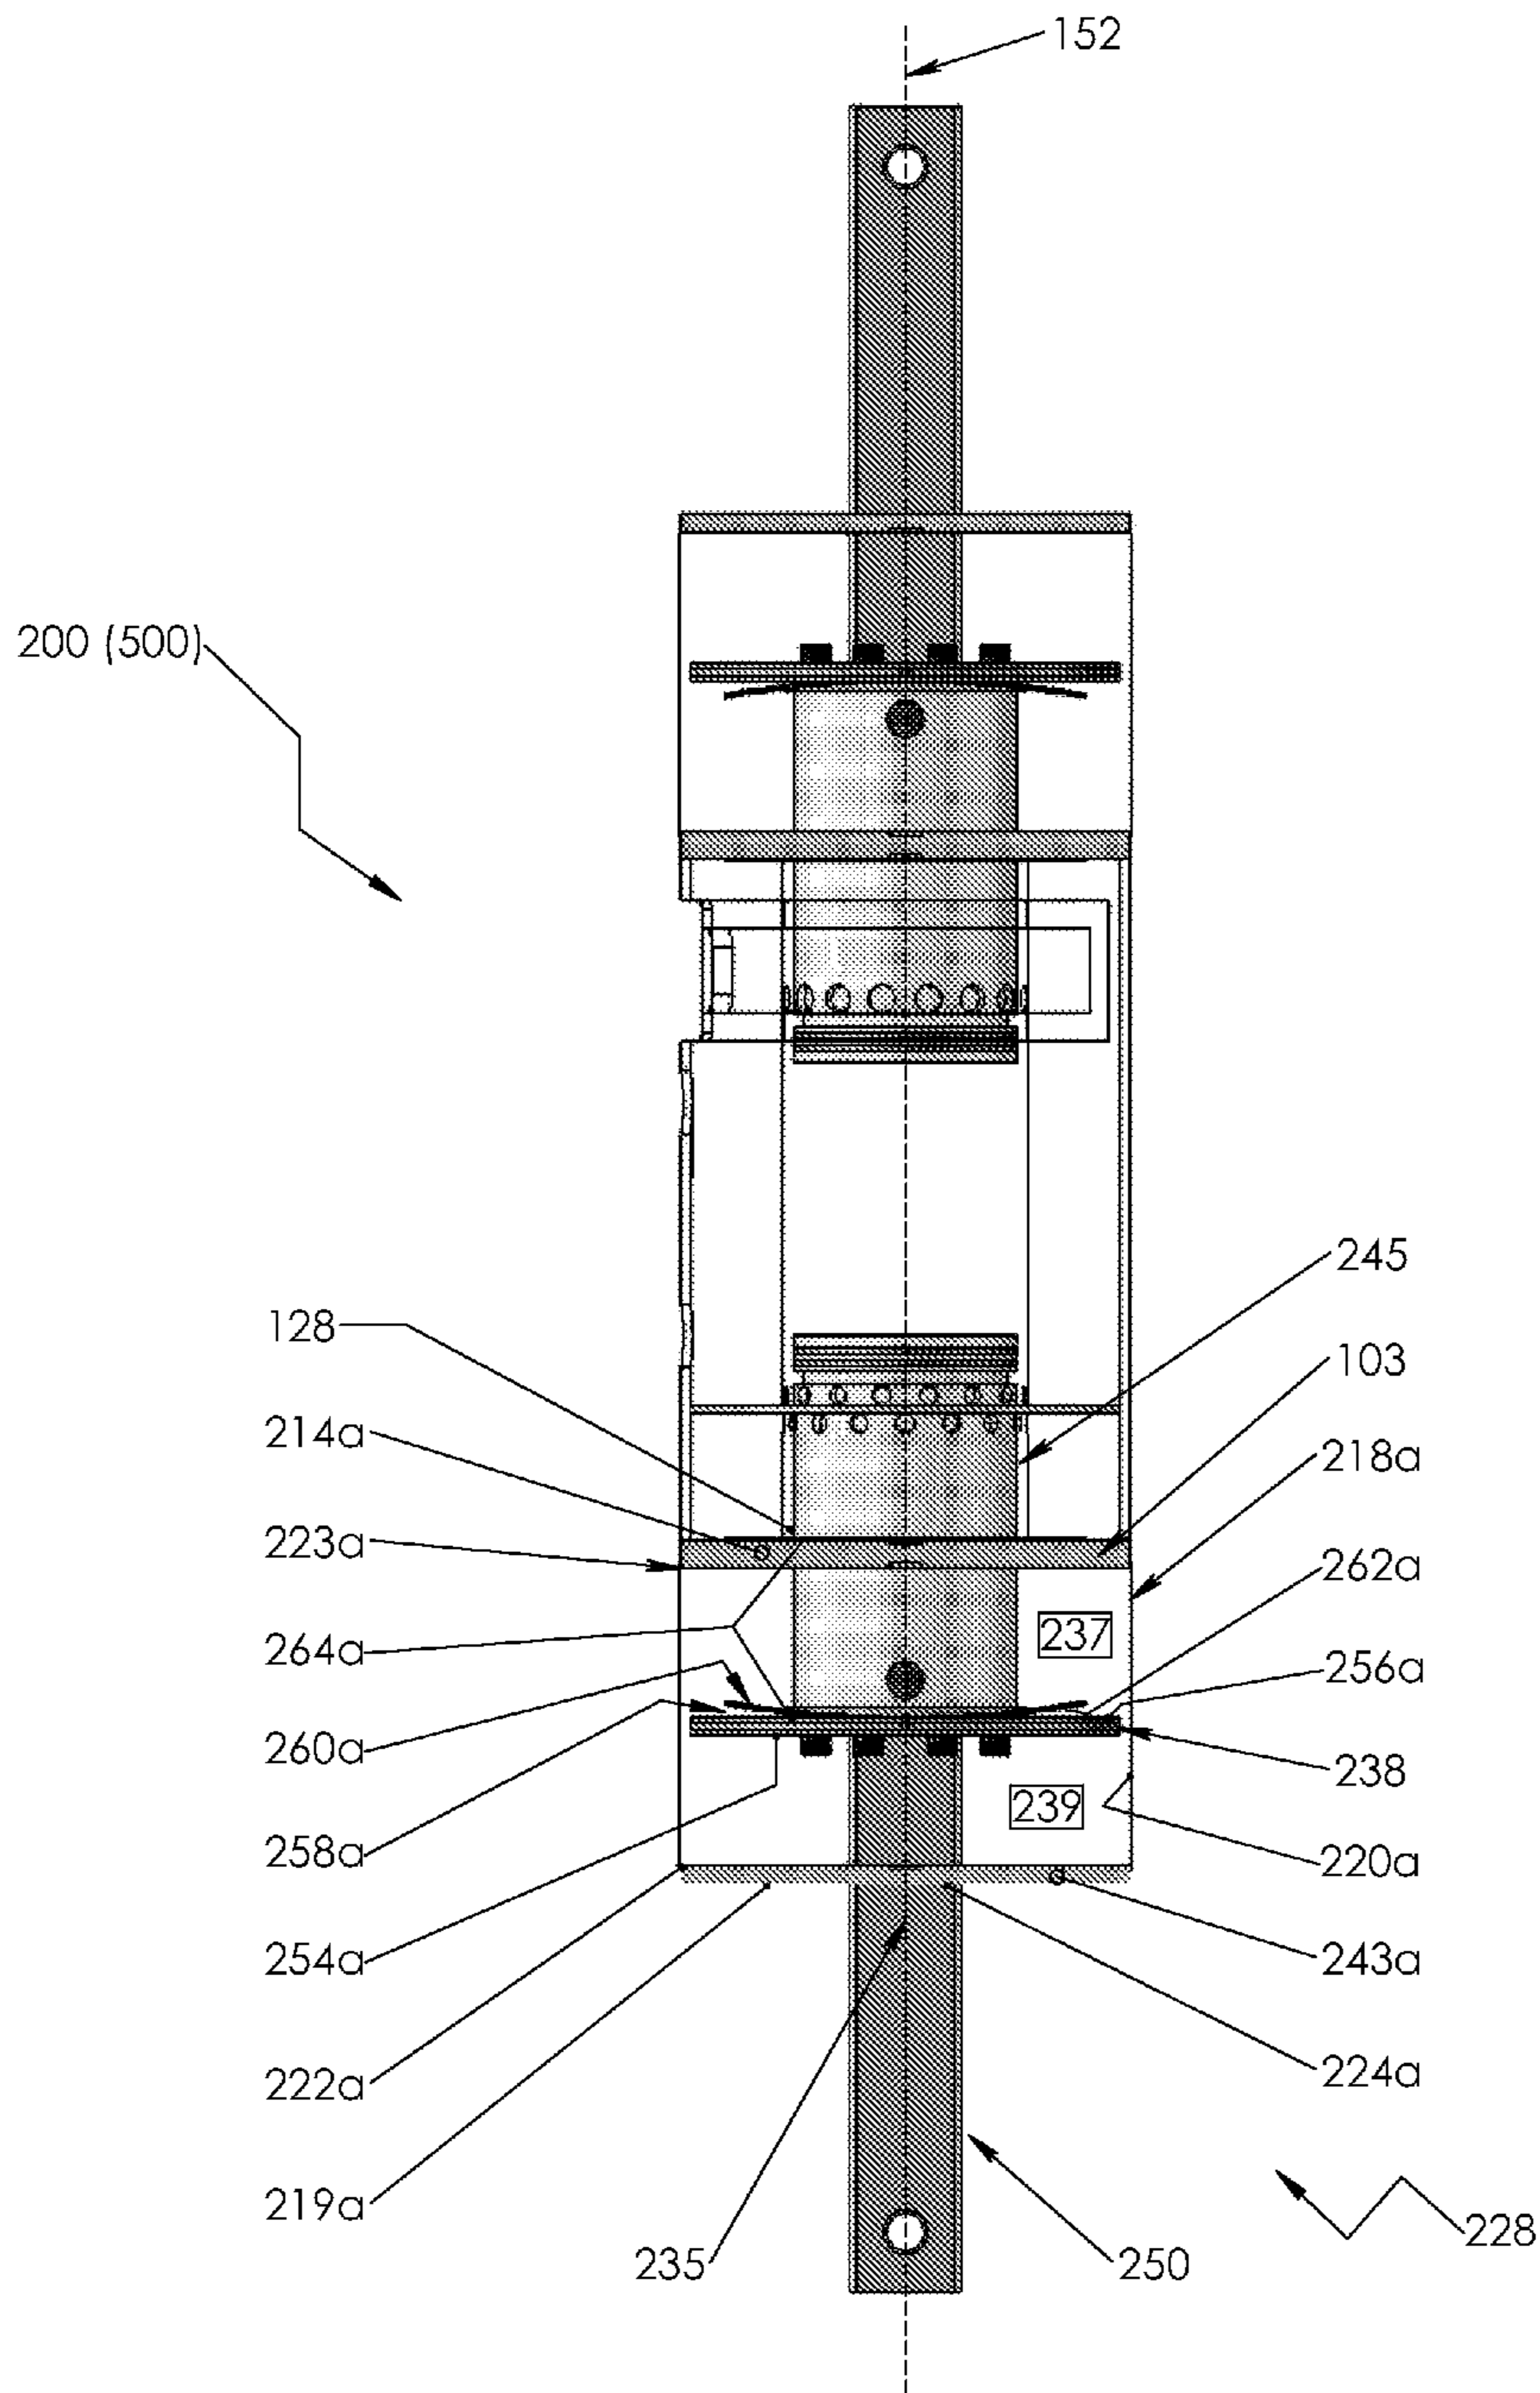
C. SIDE, CROSS-SECTIONAL VIEW OF COMBUSTION ASSEMBLY DETAILING COMBUSTION SECTION
